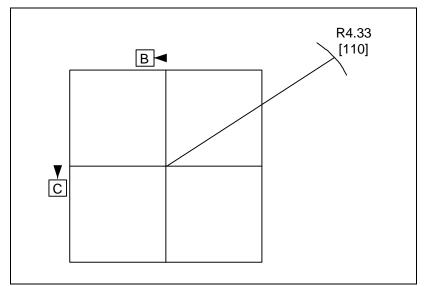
Baseboard Power Header Placement Relative to Processor Socket
